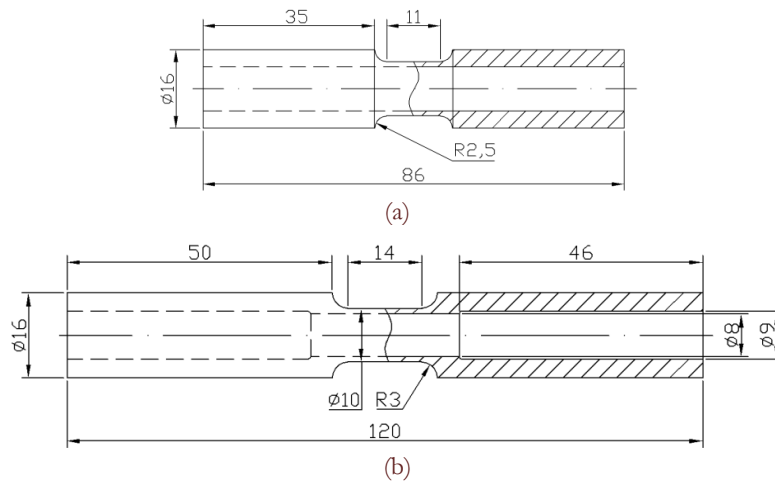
Shape and dimensions of thin-walled tubular specimens of steel 15X2ГМФ (a) and steel 40X (b).
